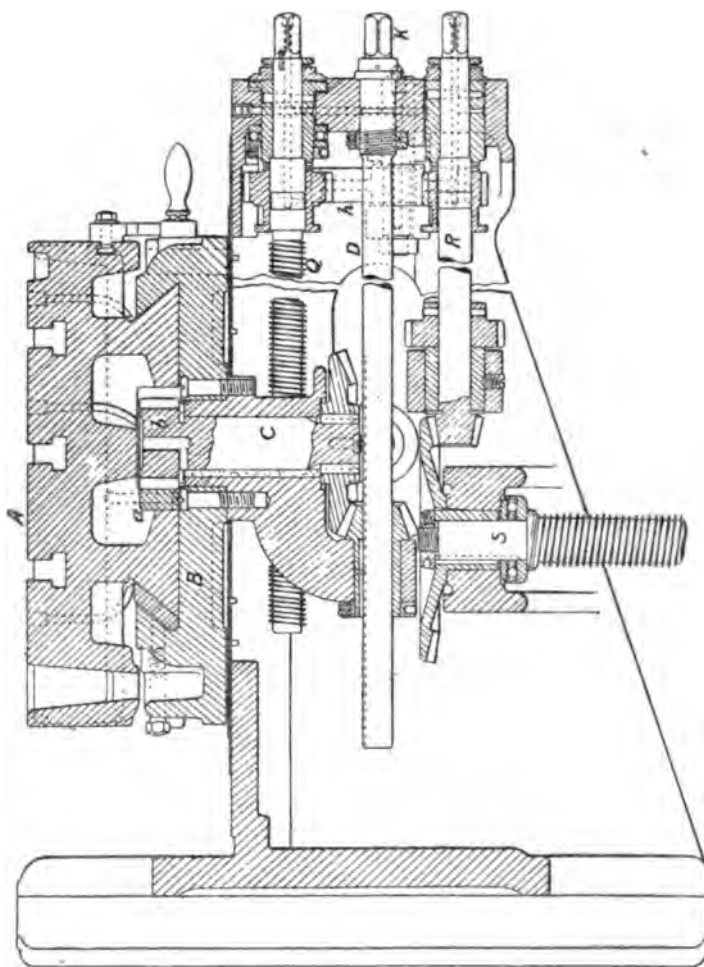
Section through Knee and Table, No. 5 B. & S. Miller.
